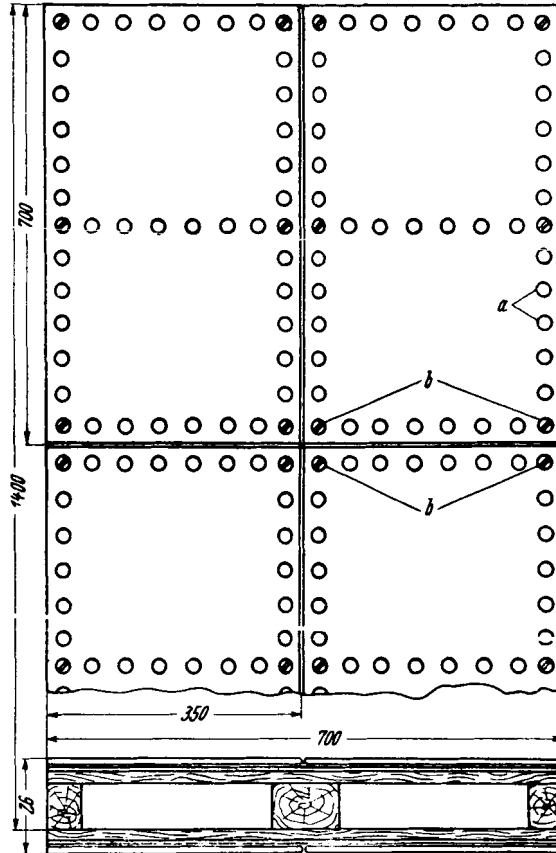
Surface C; flush riveted; arrangement of rivets and screws, a, flush rivets
